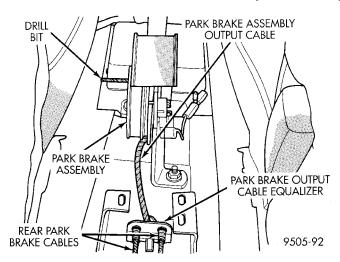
Park Brake Cables Properly Installed In Equalizer
